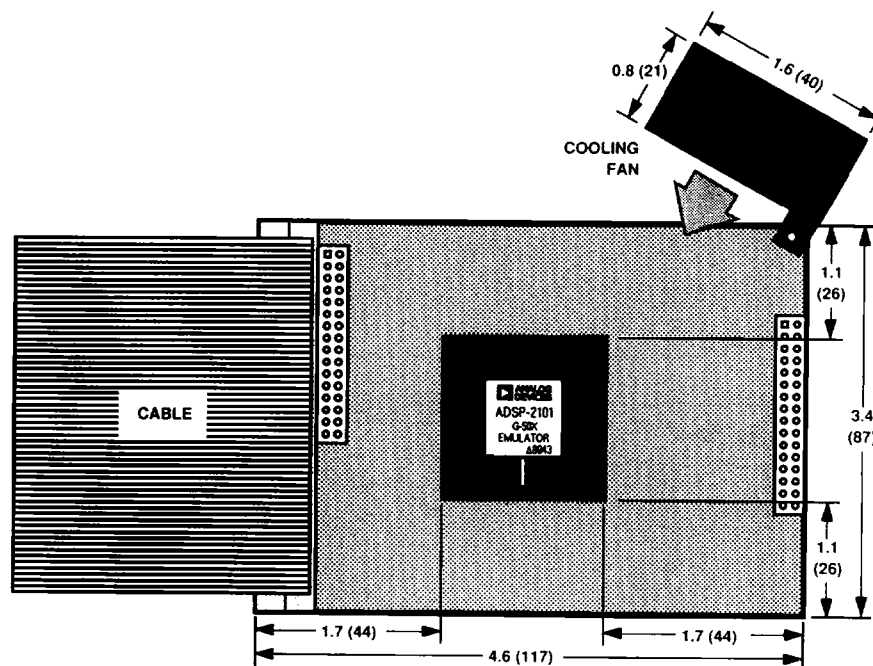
Probe (Top View) Dimensions in Inches (mm)
